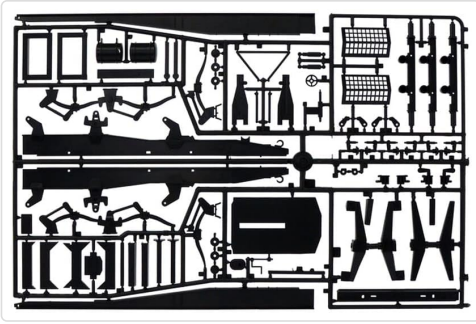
A black plastic sprue containing larger structural elements, including parts for the main chassis frame and support legs.
